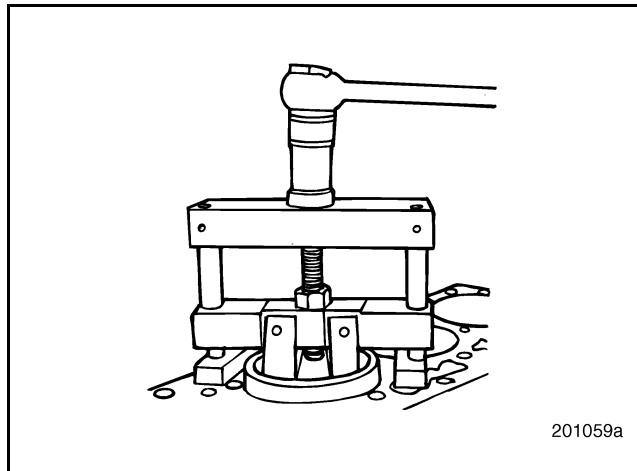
Cylinder Liner/Sleeve Puller PT6435
